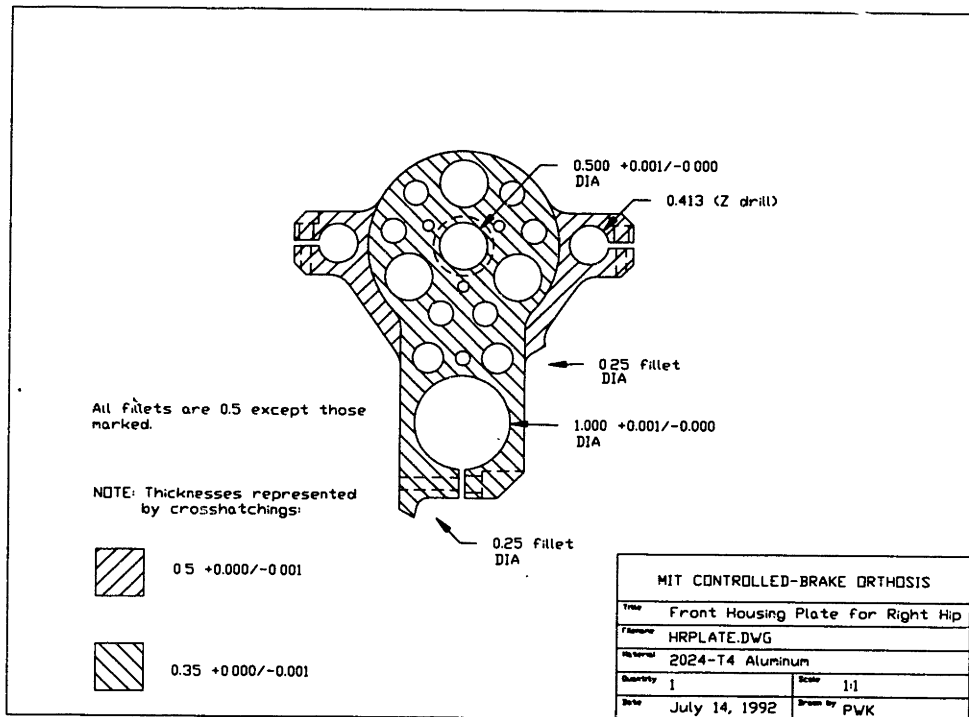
Front plate for right hip gear housing (drawing 1 of 2).
